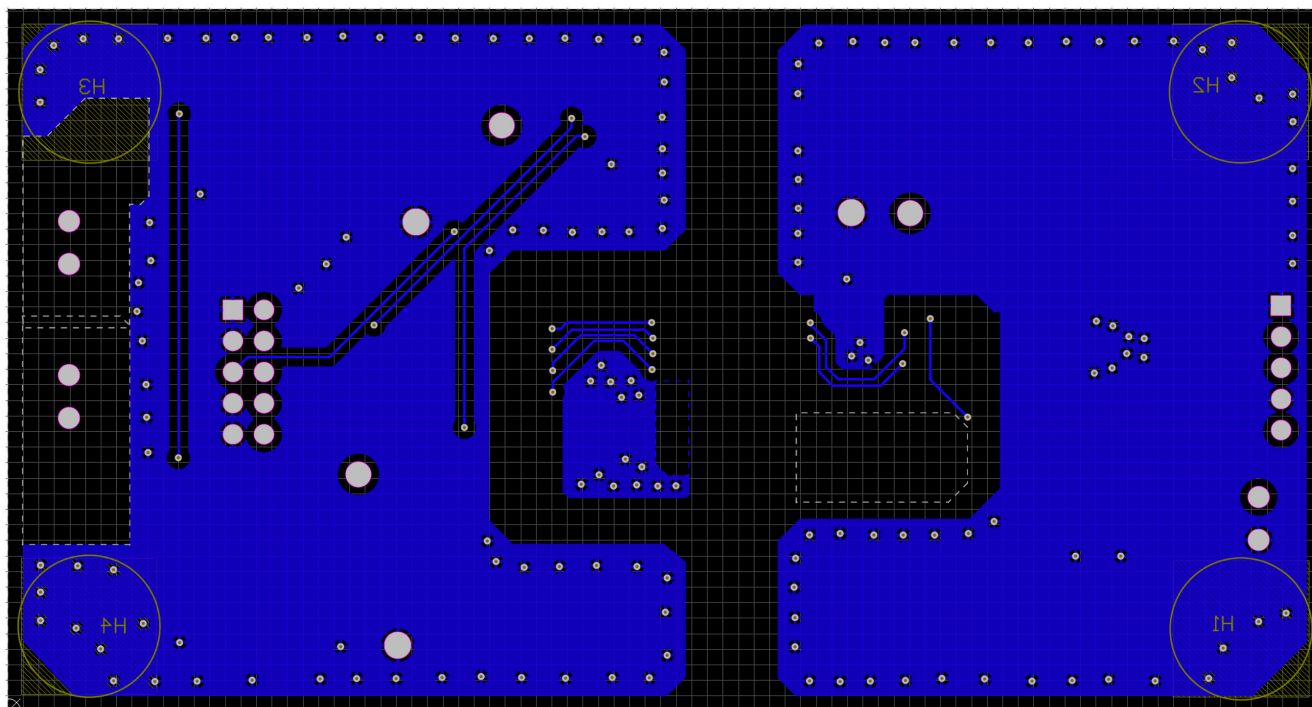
ISOW1044DFMEVM PCB Layout - Bottom Layer
